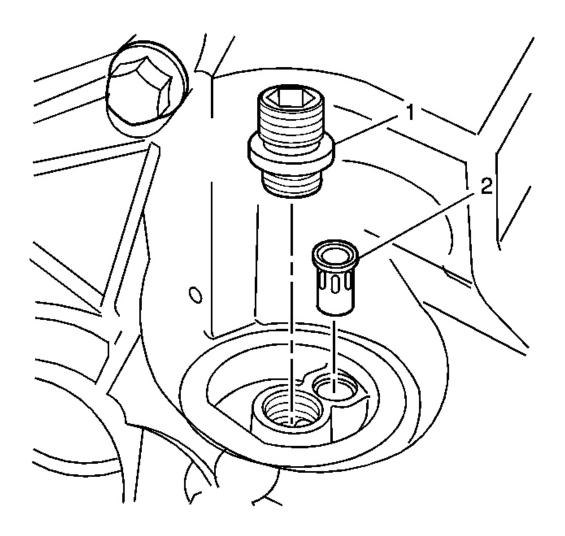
View Of Oil Filter Adapter & Bypass Valve Courtesy of GENERAL MOTORS CORP.
